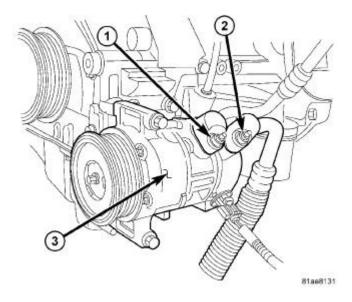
A/C Discharge Line-Compressor Courtesy of CHRYSLER LLC
